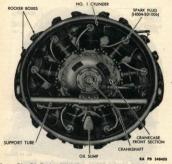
C1 Engine With Fan and Flywheel Removed—Front View
